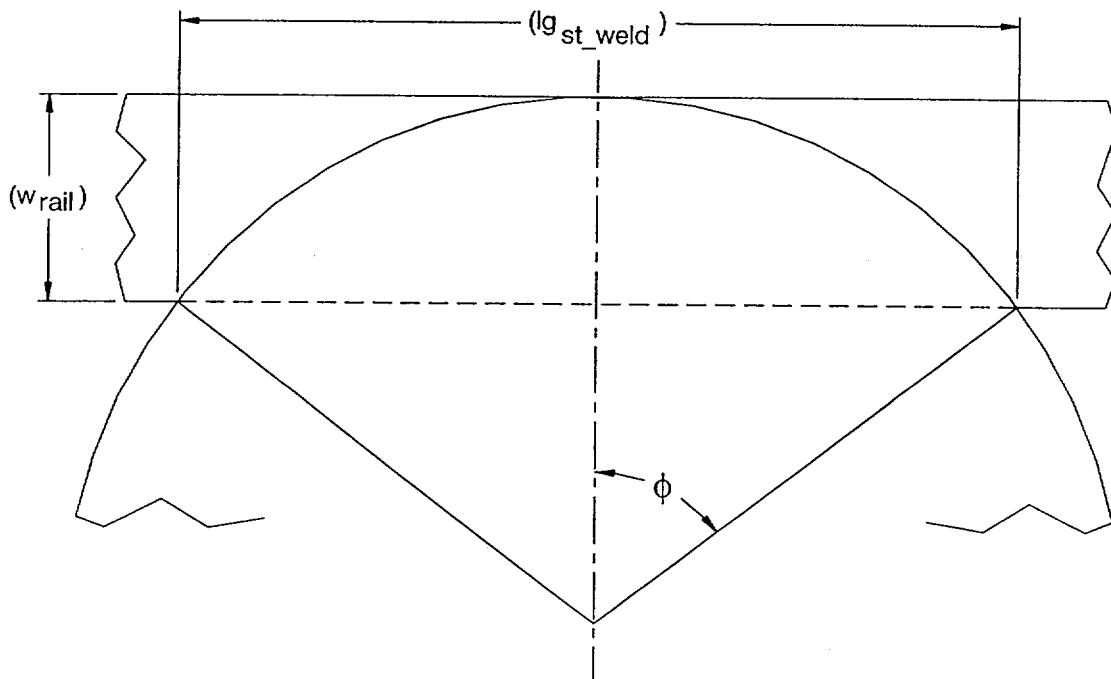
RAIL TO MTC SHELL WELD
